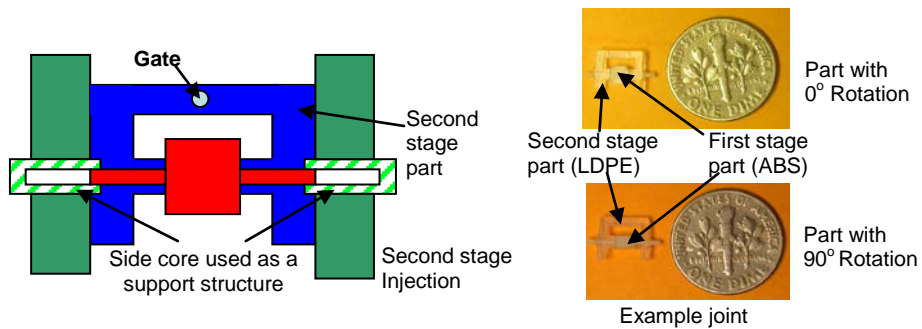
Mold design involving radial support part constraining feature to prevent deformation of premolded part (first successful demonstration of in-mold assembly at the mesoscale)
